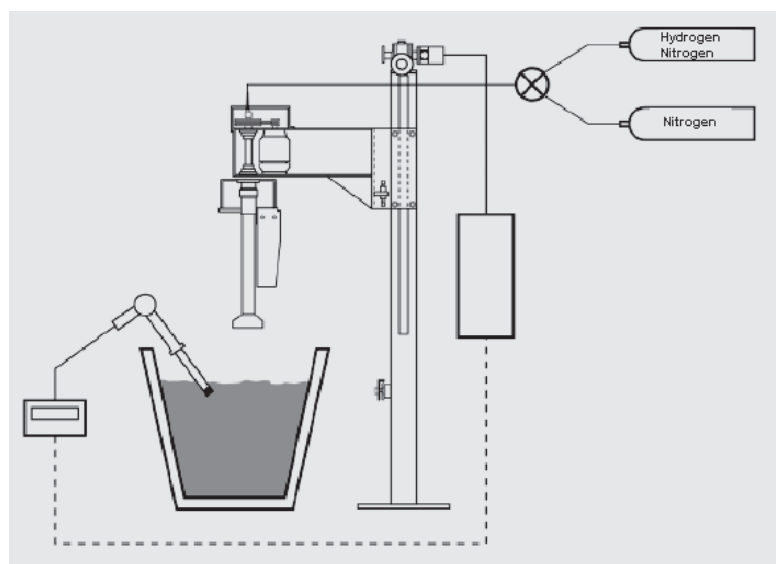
Equipment setup for gassing and degassing of aluminium melts
